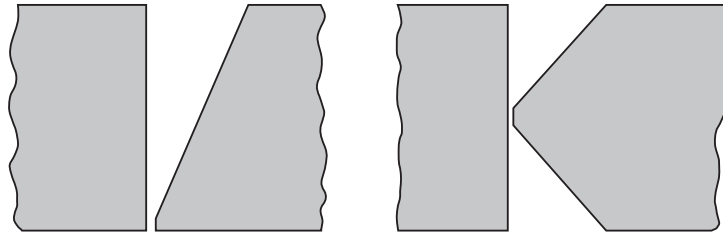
Single-bevel and K-bevel Weld Preparations
